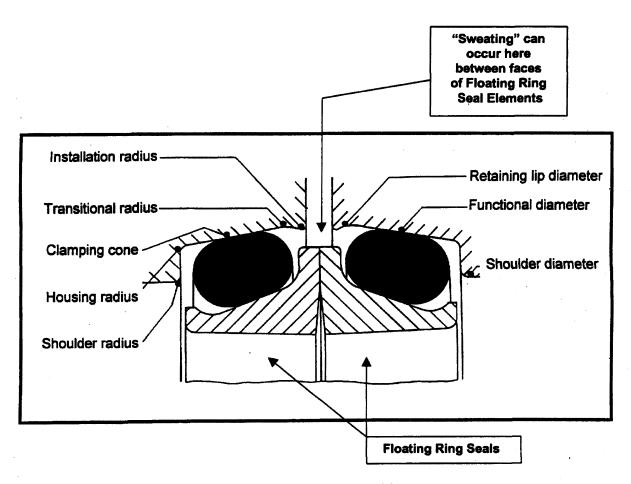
Enlarged detail of Floating Ring Seal assembly
